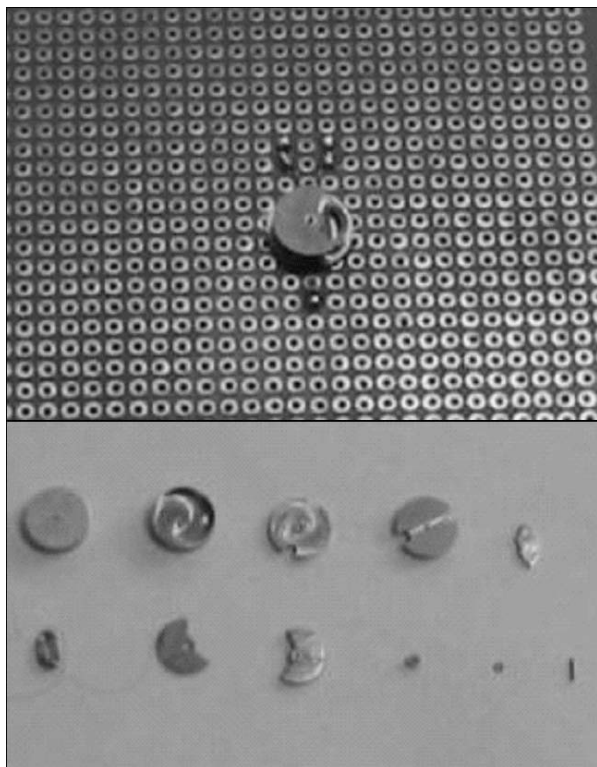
Photographs of vibration motors; (a) assembly of proposed vibration motor, (b) parts of proposed vibration motor
